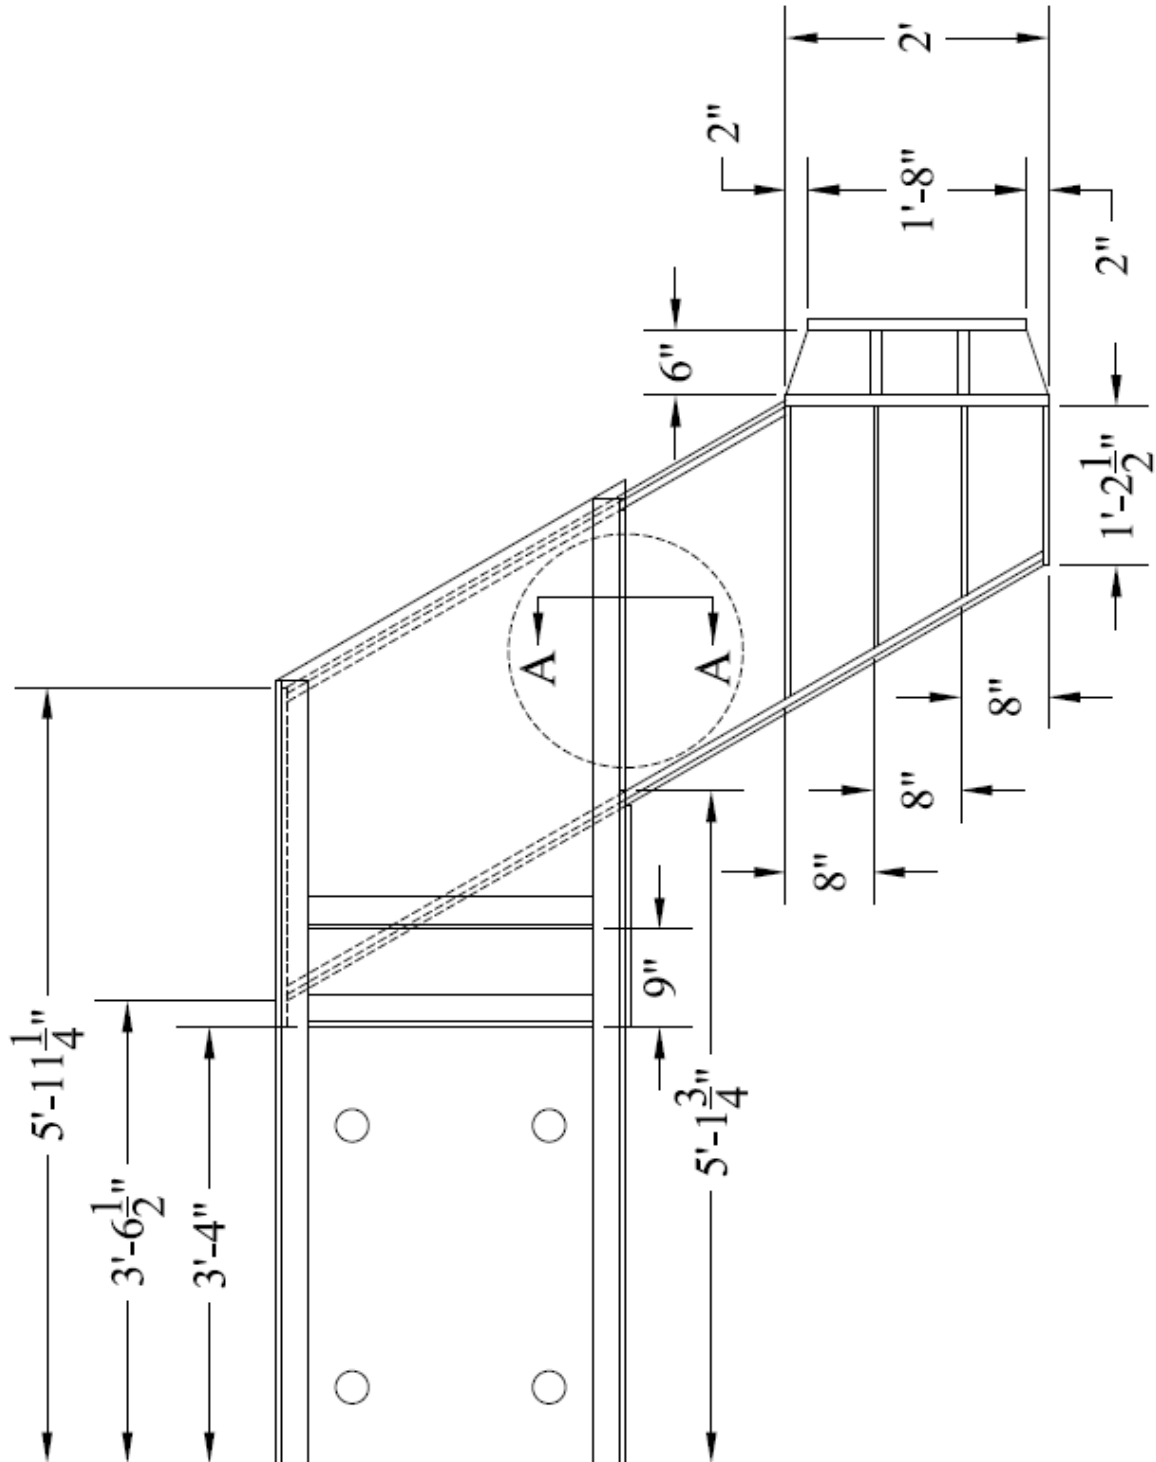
Loading Frame Front View (1 in. = 25.4 mm)
